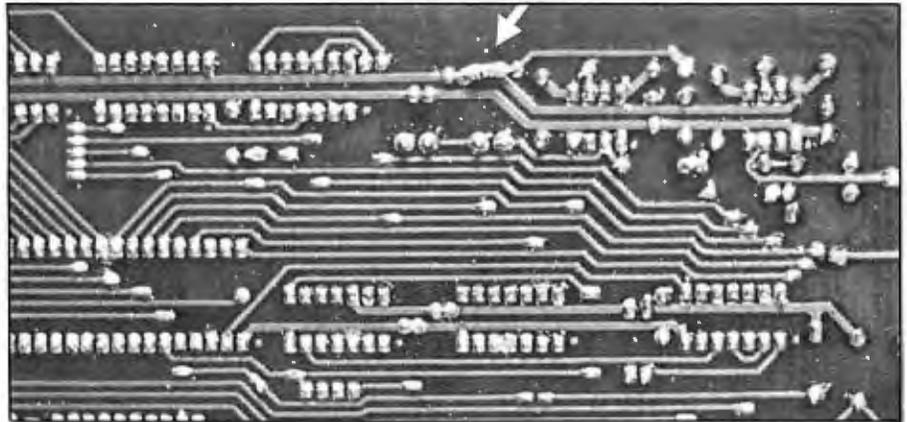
To ensure proper operation of the 6809 processor board, in a modified system, resistor R20 should be installed on the solder side of the board, as shown. It is necessary to trim the leads flush with the top of the board, since they will be covered by the NMI/RESET connector.
